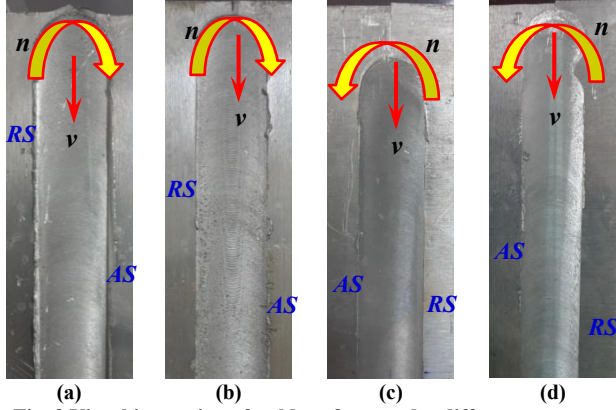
Visual inspection of weld surfaces under different process conditions, (a) Square pin ($n = 1240$ rpm, $v = 80$ mm/min), (b) Square pin ($n = 1240$ rpm, $v = 315$ mm/min), (c) Taper-Threaded pin ($n = 870$ rpm, $v = 80$ mm/min), and (d) taper-threaded pin ($n = 1240$ rpm, $v = 80$ mm/min).
